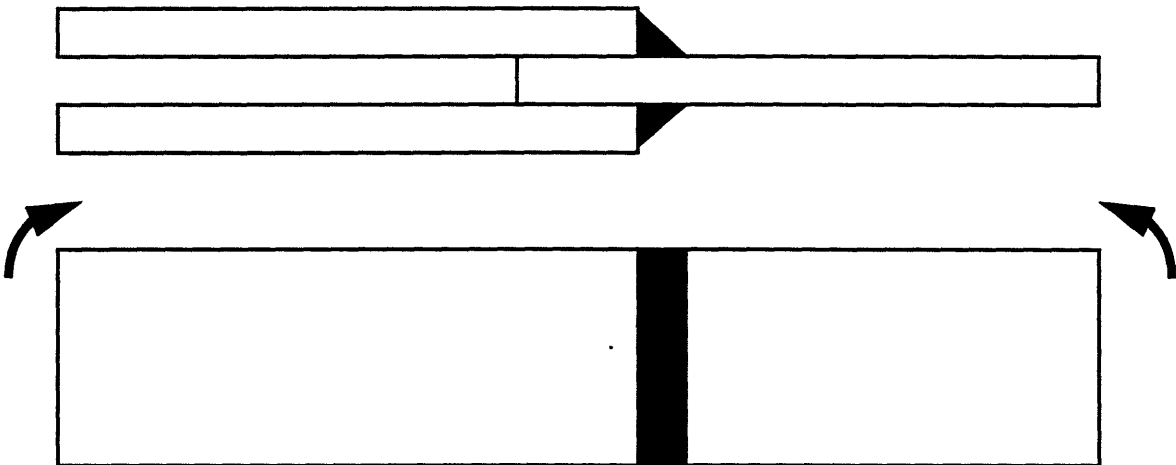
(b). Double lap welded joint specimen loaded in bending along the longitudinal axis
